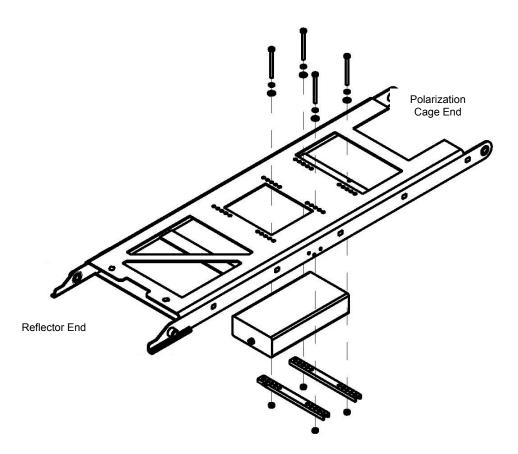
Attaching BUC using Universal Transmitter Brackets
